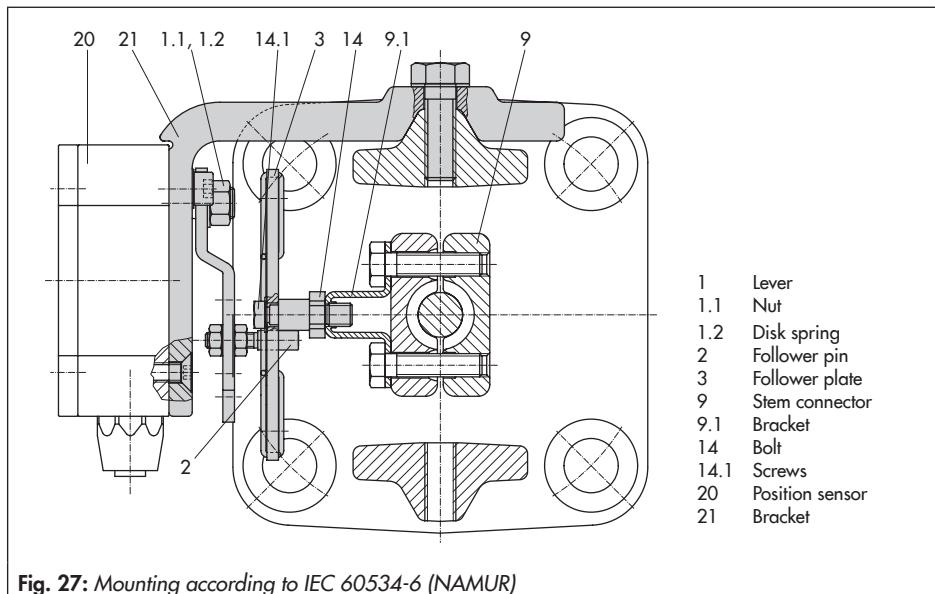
Mounting according to IEC 60534-6 (NAMUR)
